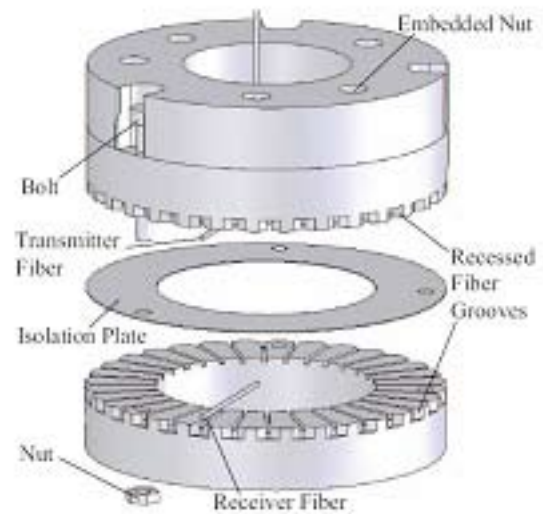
Expanded view of the sensor. The top and bottom pieces were made from plywood using a LaserCMM rapid prototyping machine. Transmitting optical fibers are placed in the grooves on the top piece. Receiving optical fibers are placed in the grooves on the bottom piece. There is an isolation plate between the two fibers to prevent stray light leaking from one fiber to the other. The entire assembly is bolted together.
